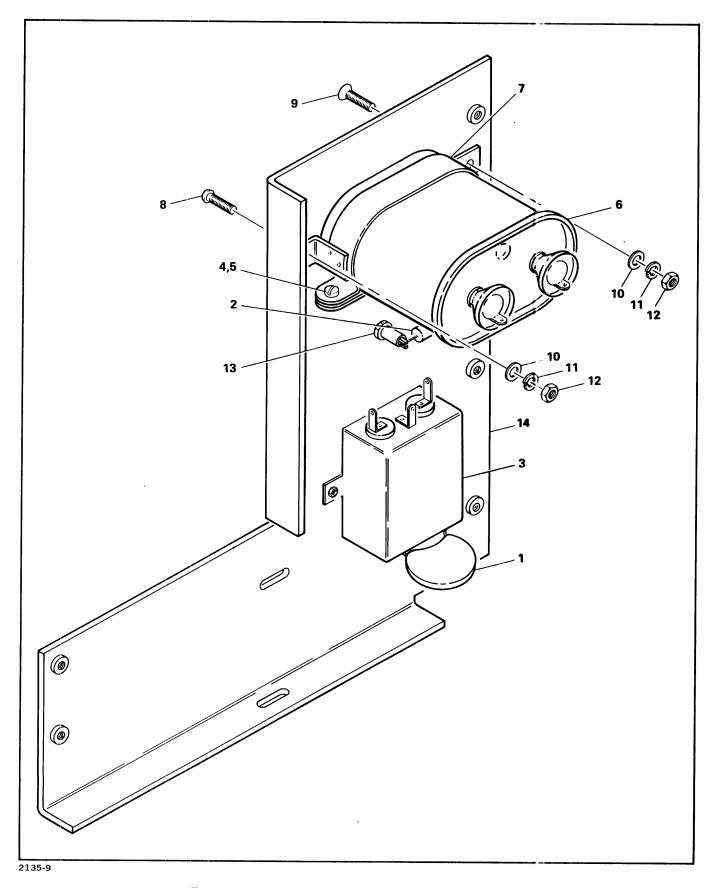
Plenum Chamber Side Bracket, Exploded View
